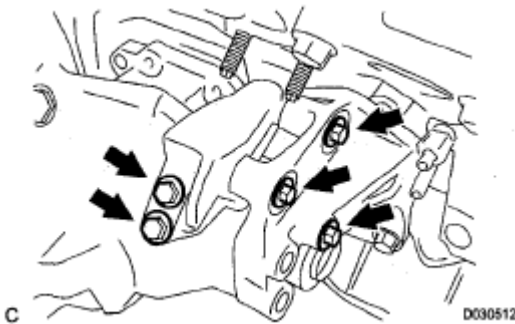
Locating Transfer Stiffener Plate RH Bolts
